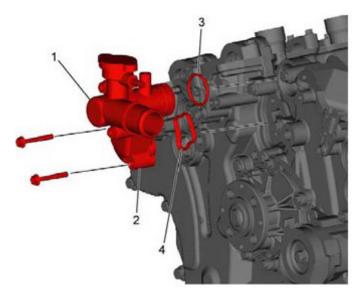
Identifying Water Outlet Pipe No. 1, Water Outlet Pipe No. 2, O-Ring And Gasket Courtesy of SUZUKI OF AMERICA CORP.
